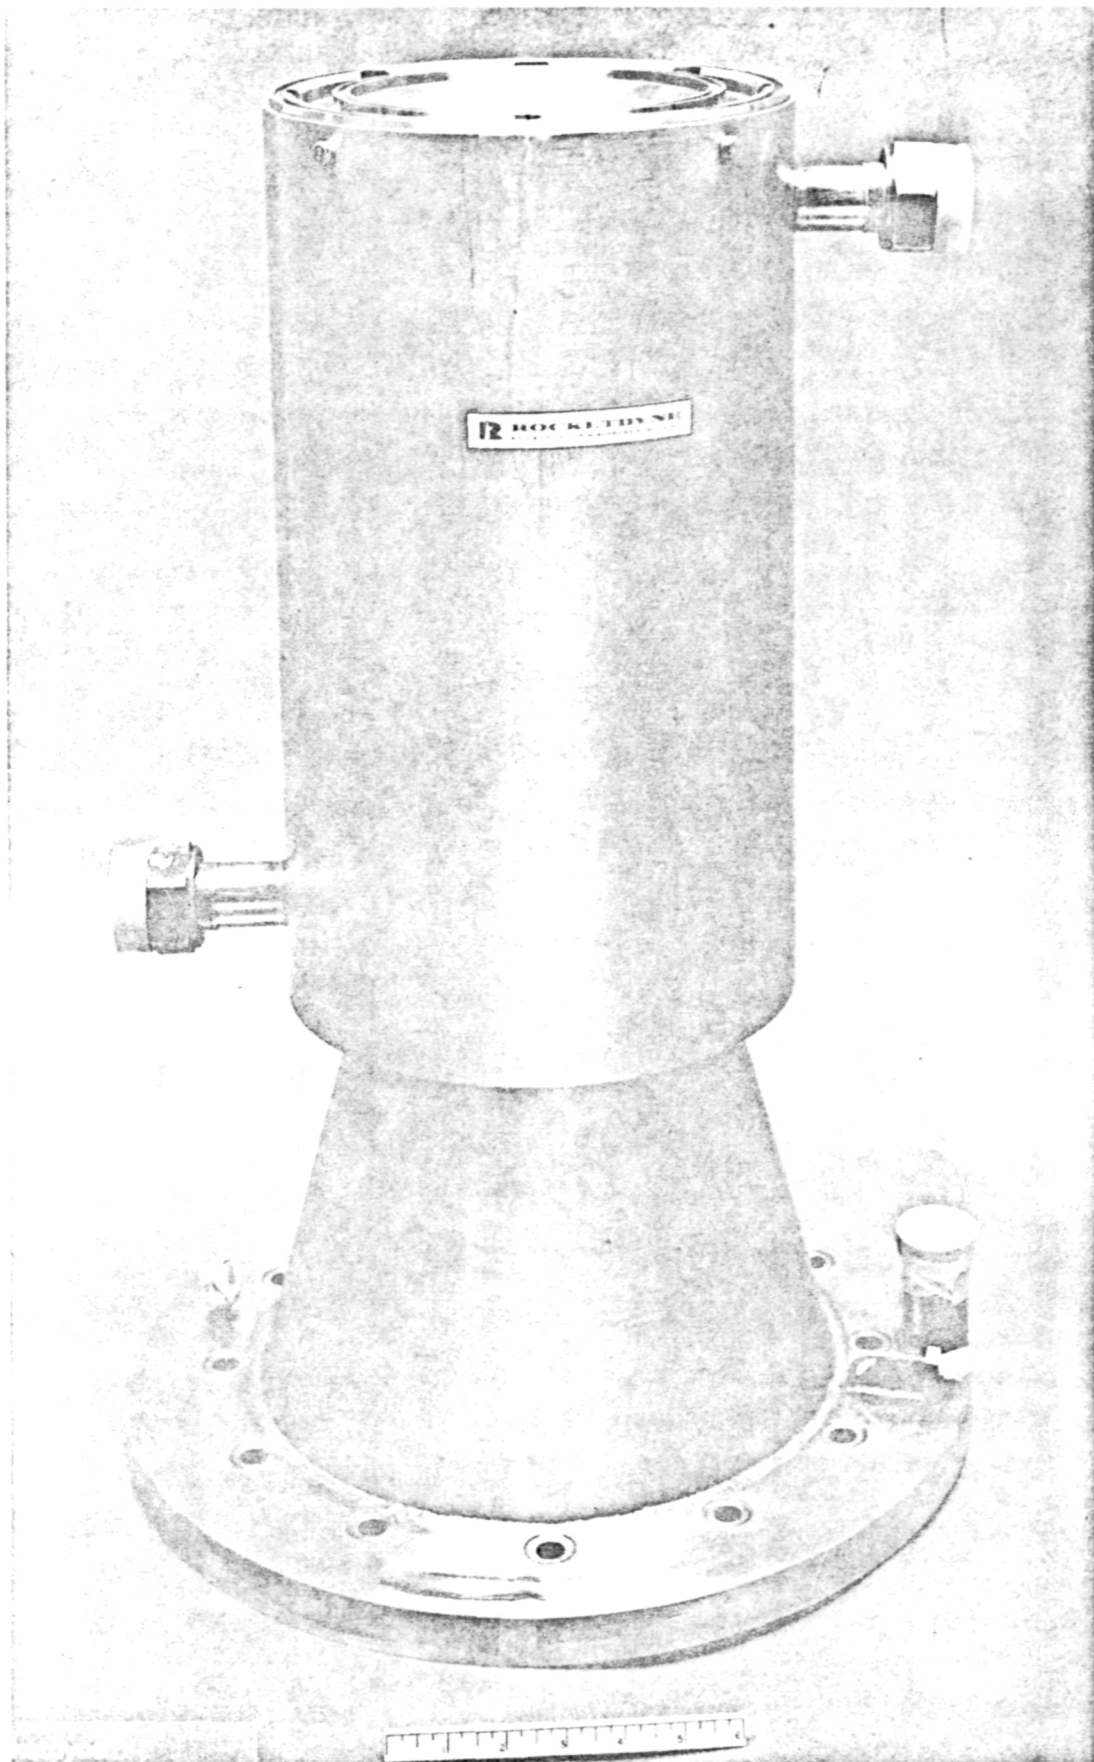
Final Assembly of No. 1 Thrust Chamber with Auxiliary Water Cooling Jacket Installed
